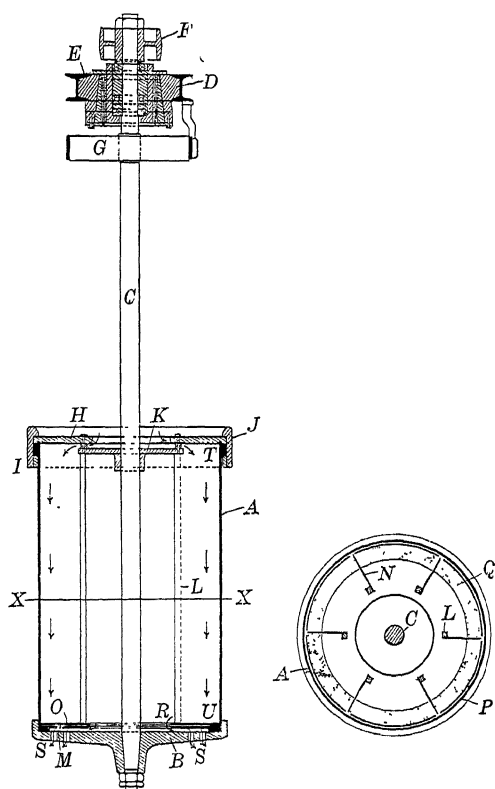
THE GEE CENTRIFUGAL ORE-GRADING MACHINE.
